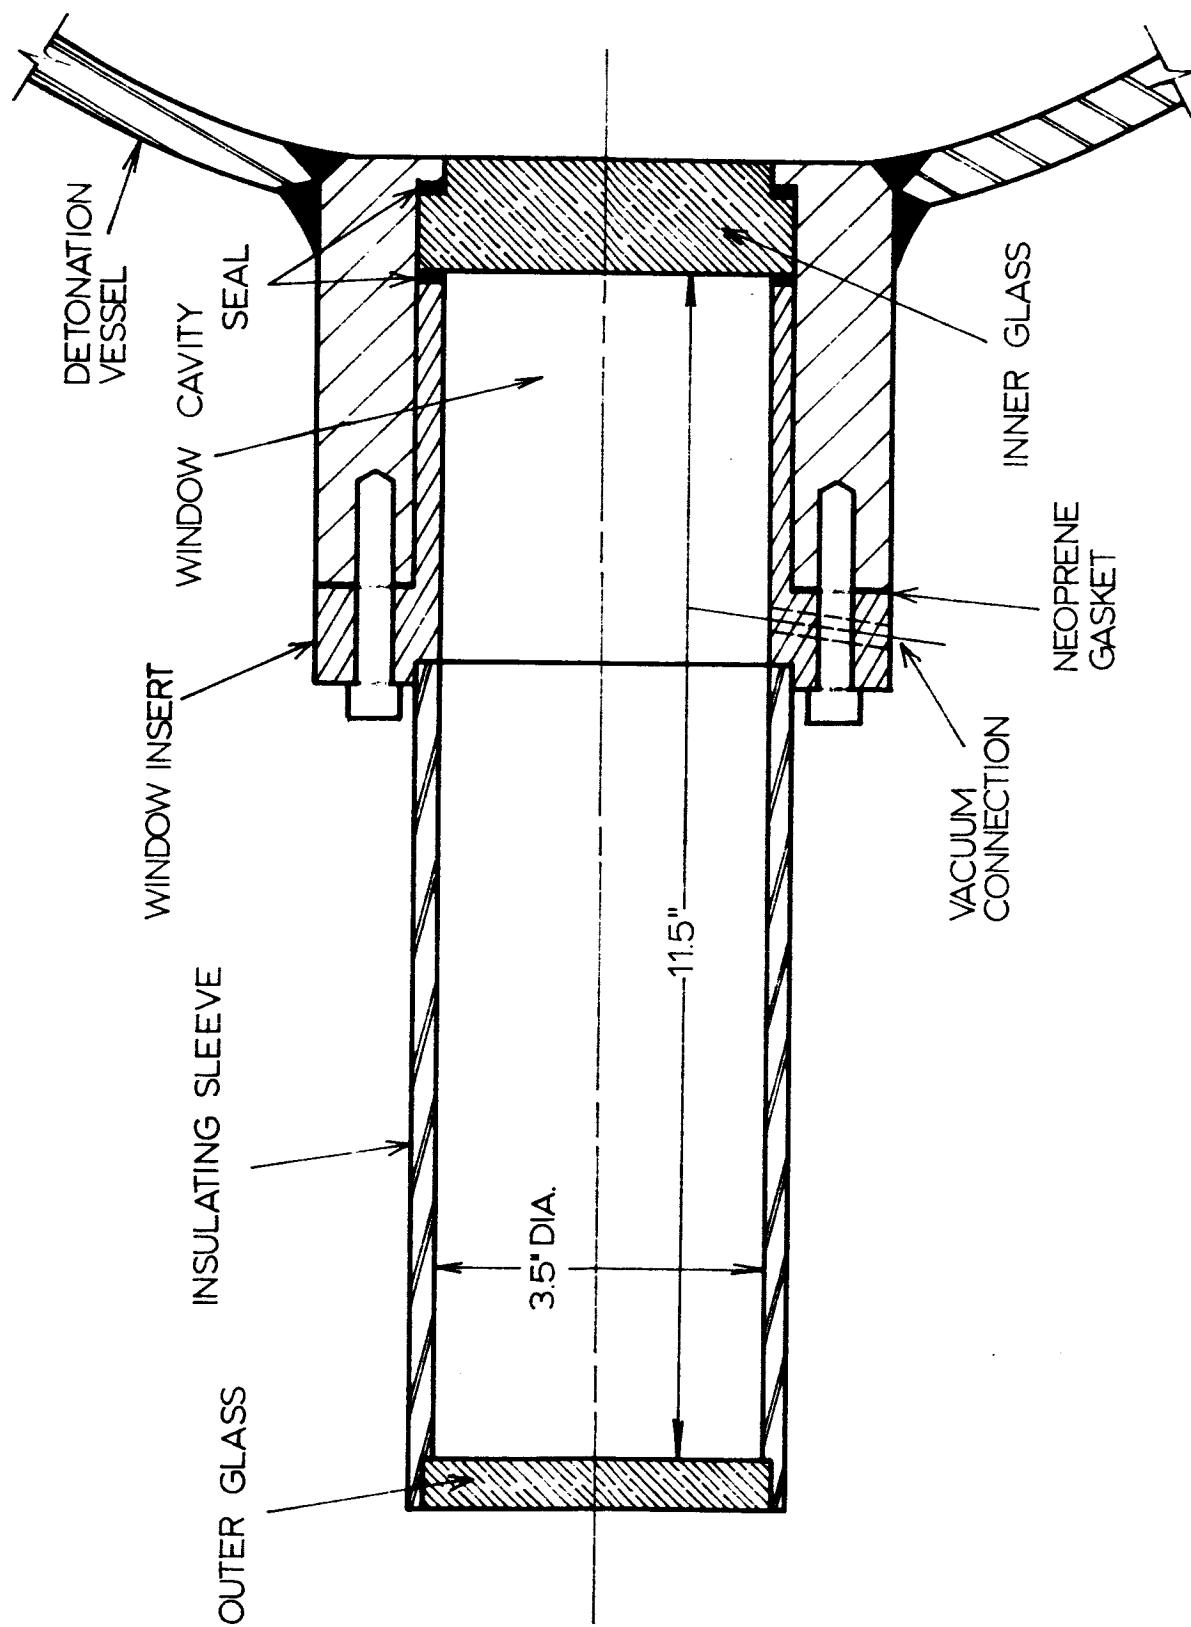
Sectional view of schlieren observation ports in Vessel CD
